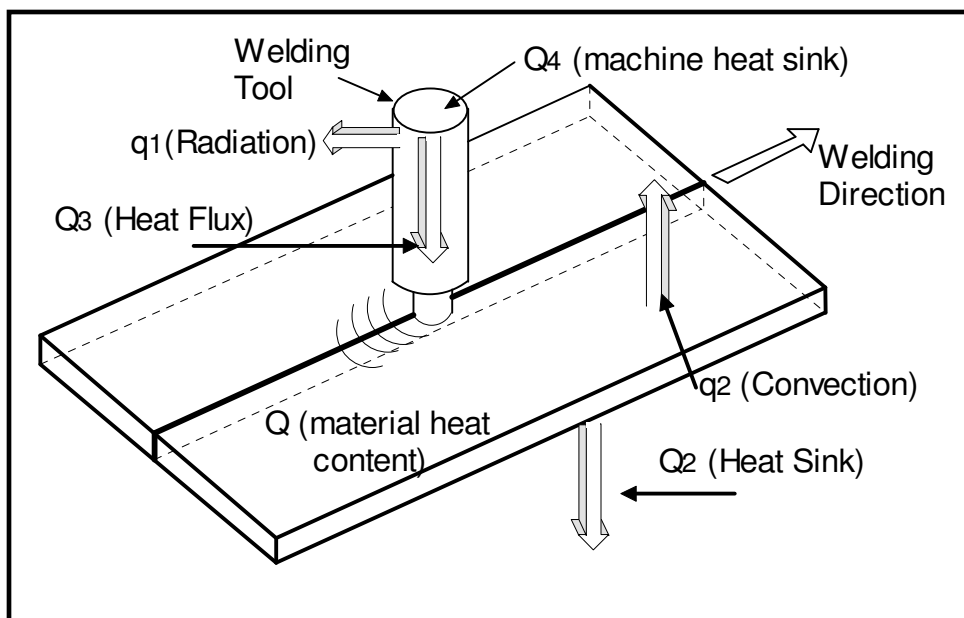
Heat transfer between the welding tool and the welded material [Chao et al., 2003].
